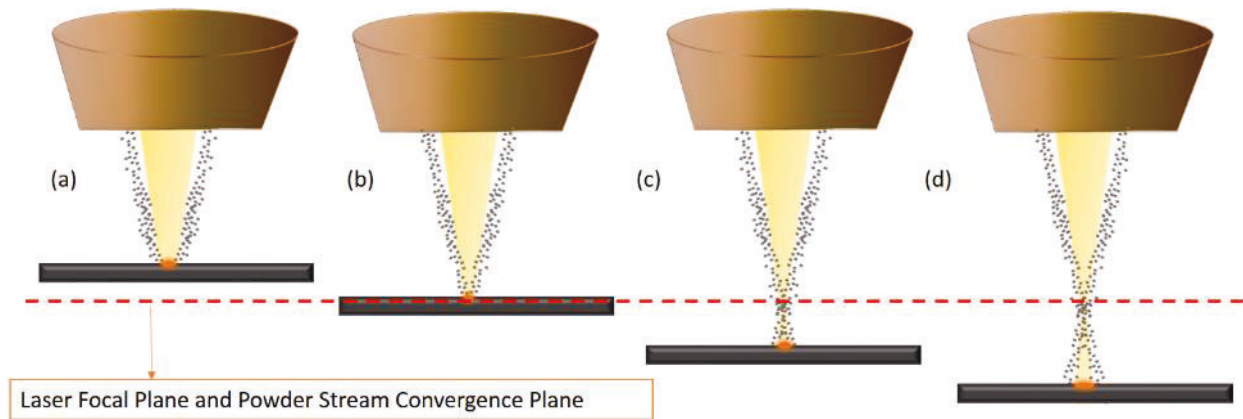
Workpiece location, (a) 14 mm, (b) 15 mm, (c) 16 mm (d) 20 mm below nozzle head.
